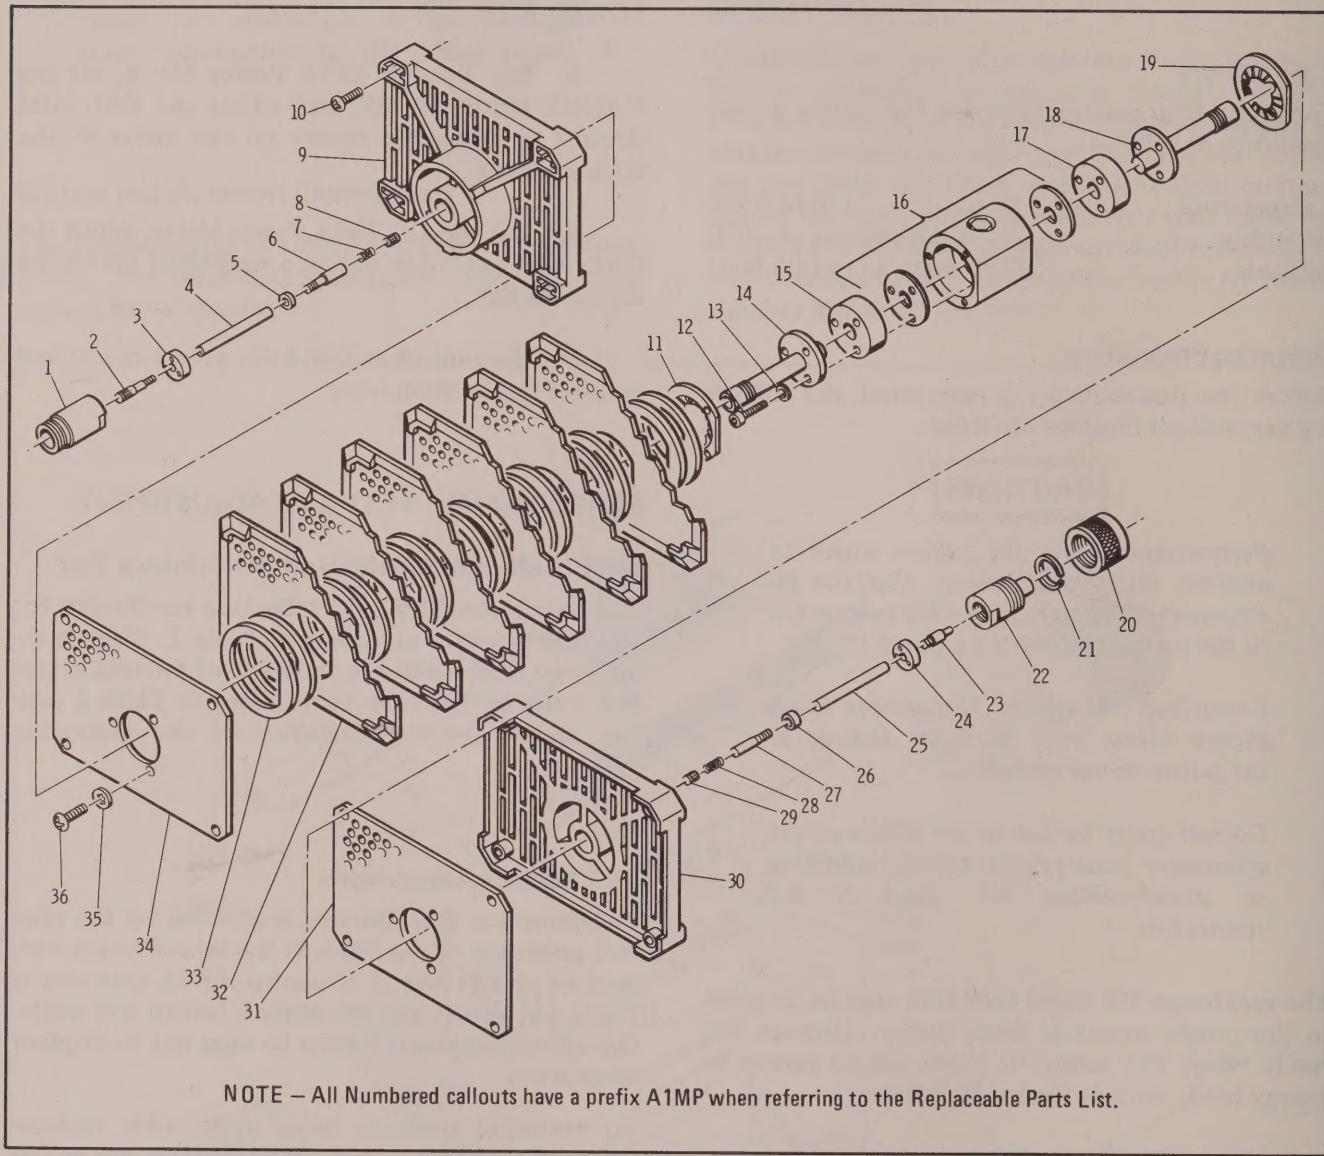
Illustrated Parts Breakdown of the A1 Attenuator Assembly
